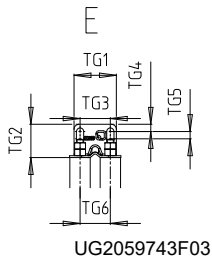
Mounting bracket dimensions, twin guide rail arrangement
